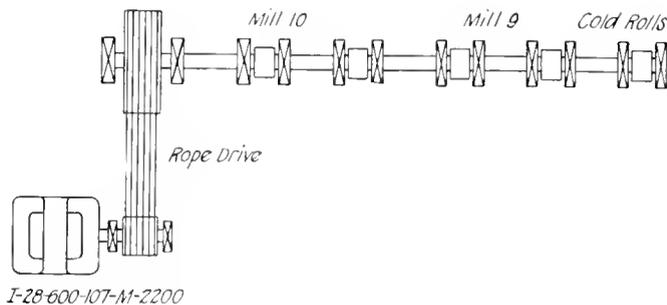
Plan of 30 in. Four-Stand Sheet Mill
